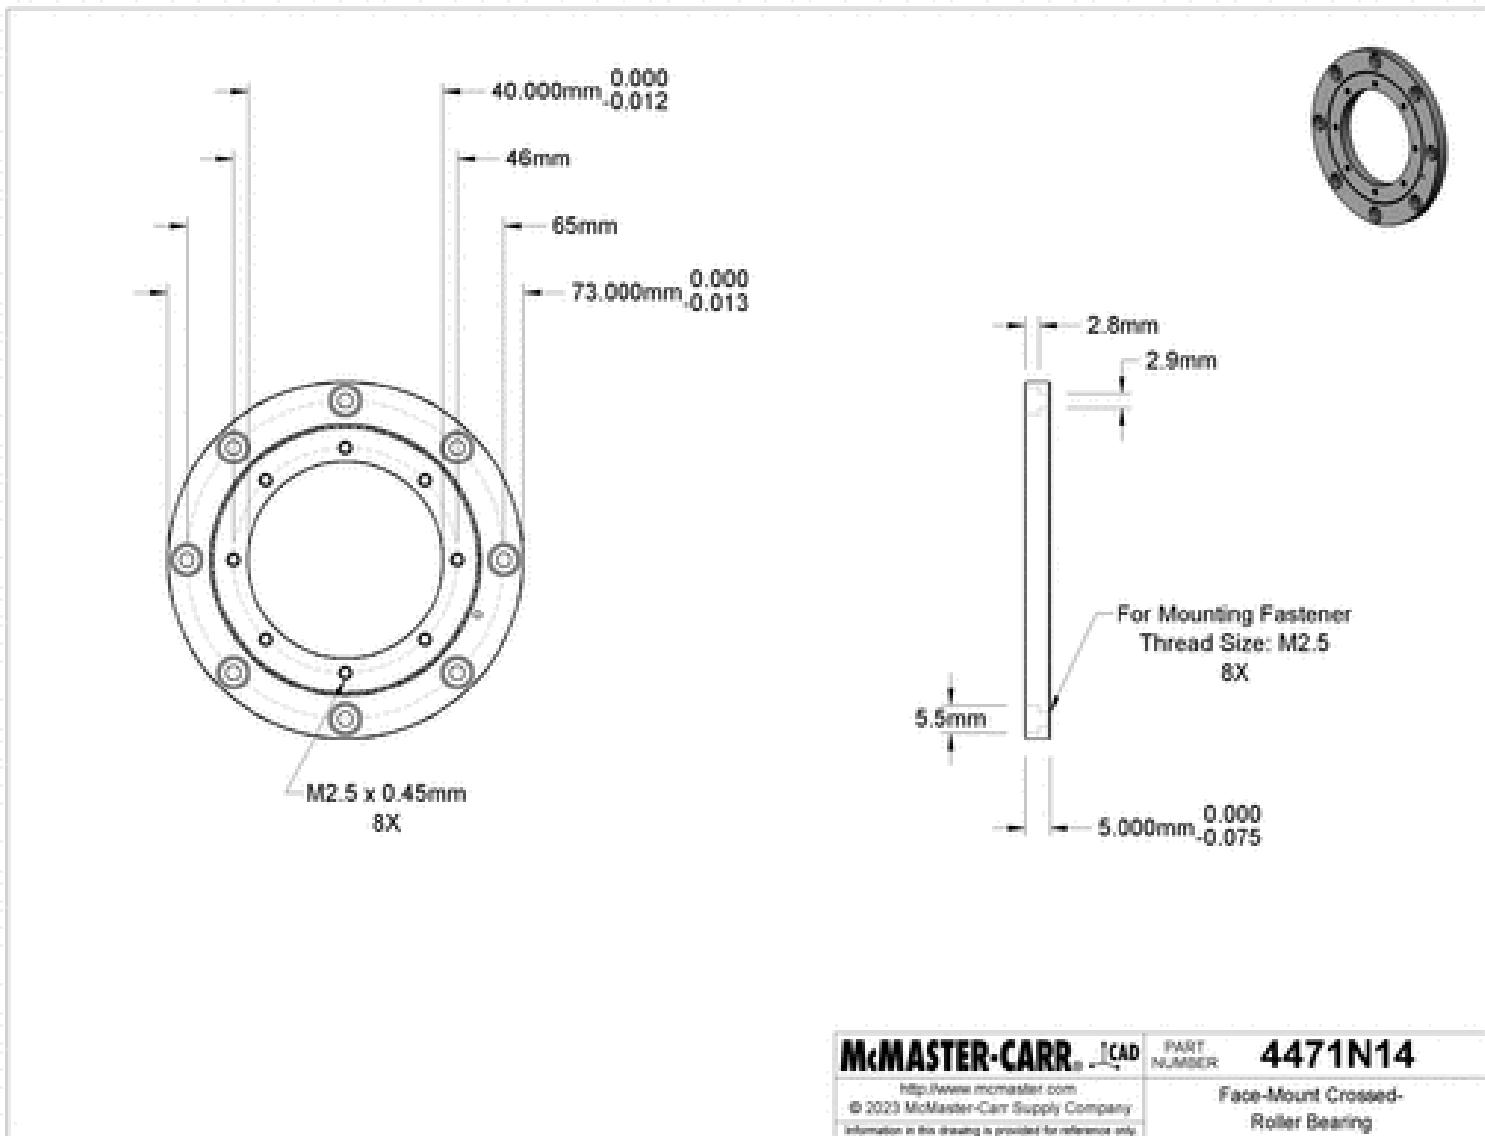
J4 Cross Roller Bearing Engineering Drawing
